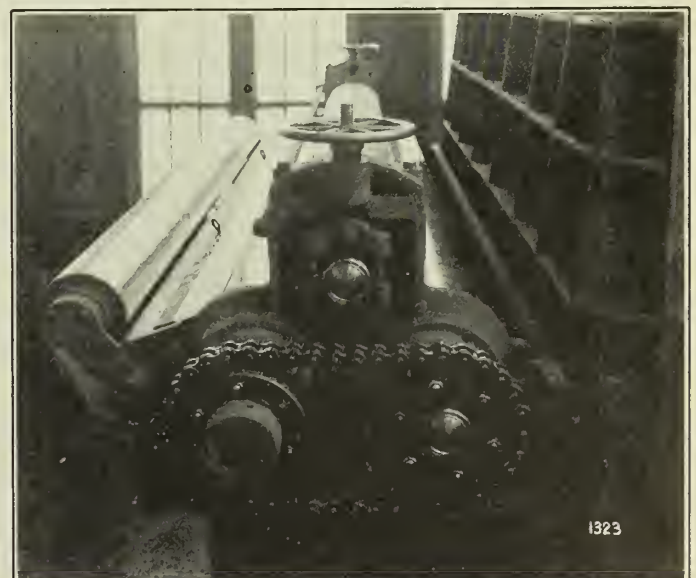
Vacuum Dryer Type 11-48-154, Outgoing Seal Assembled in Place—showing End Frame, Two Bronze Covered Rolls and Rubber Covered Roll with Lifting Device.
